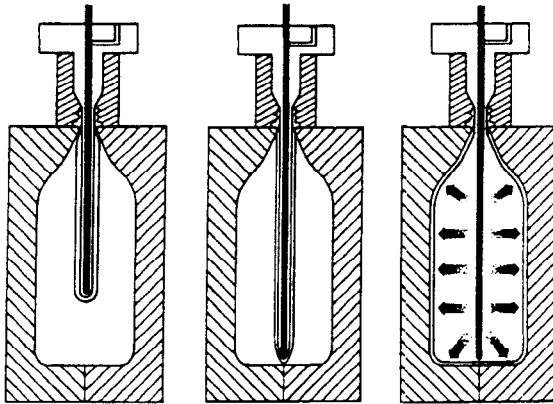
Stretch Blow Molding of Bottles [Miller, 1983]. A heated preform melt is positioned in the blow mold. A center rod descends, stretching the preform with axial orientation. Blown air expands the preform into the mold, forming the bottle with radial orientation.
